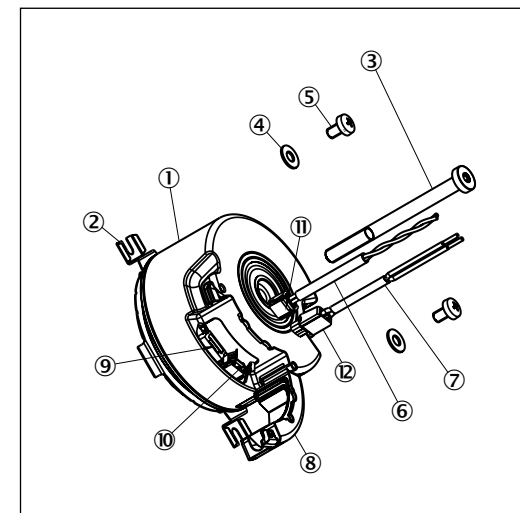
Assembly diagram for EFS50-0J/EFM50-0J/EF50-0K/EFM50-0K conical shaft and spring mounting plate
